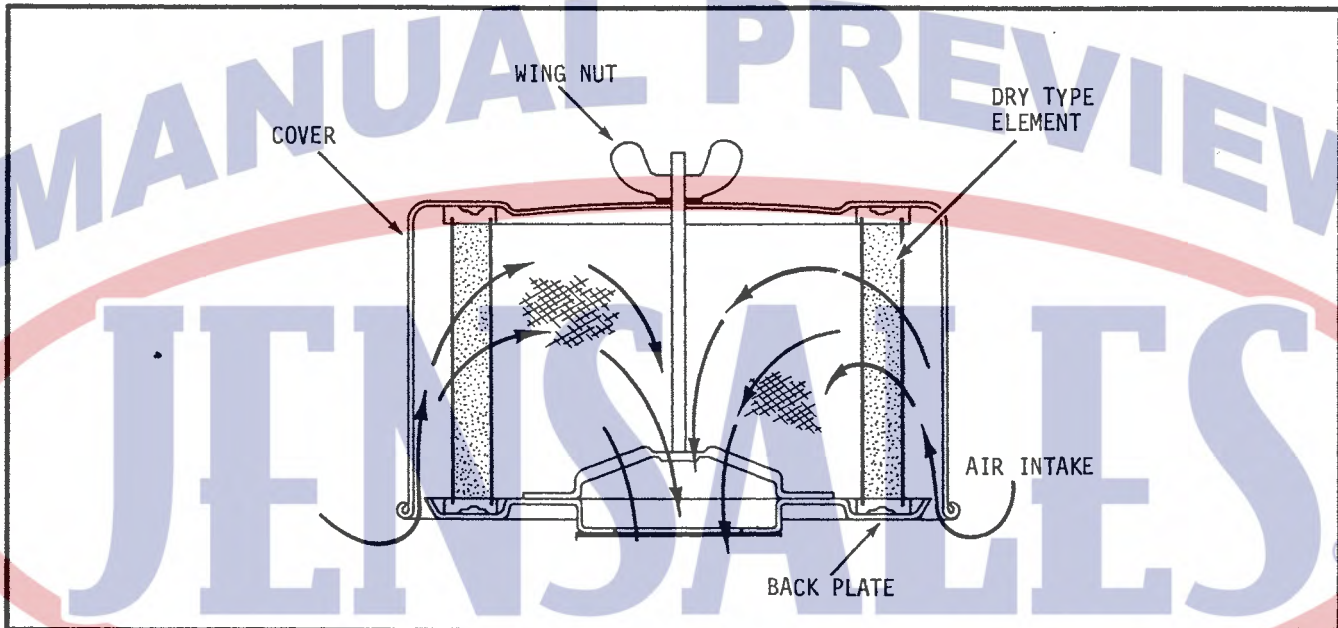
TYPICAL DRY TYPE AIR CLEANER -- CUTAWAY VIEW
